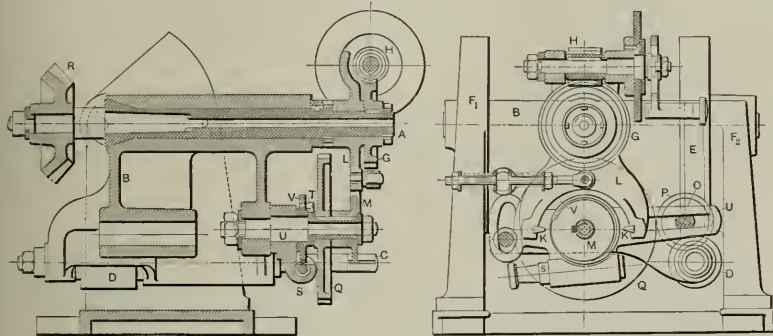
Prof. Kroll's Bevel Gear Shaping Attachment.
